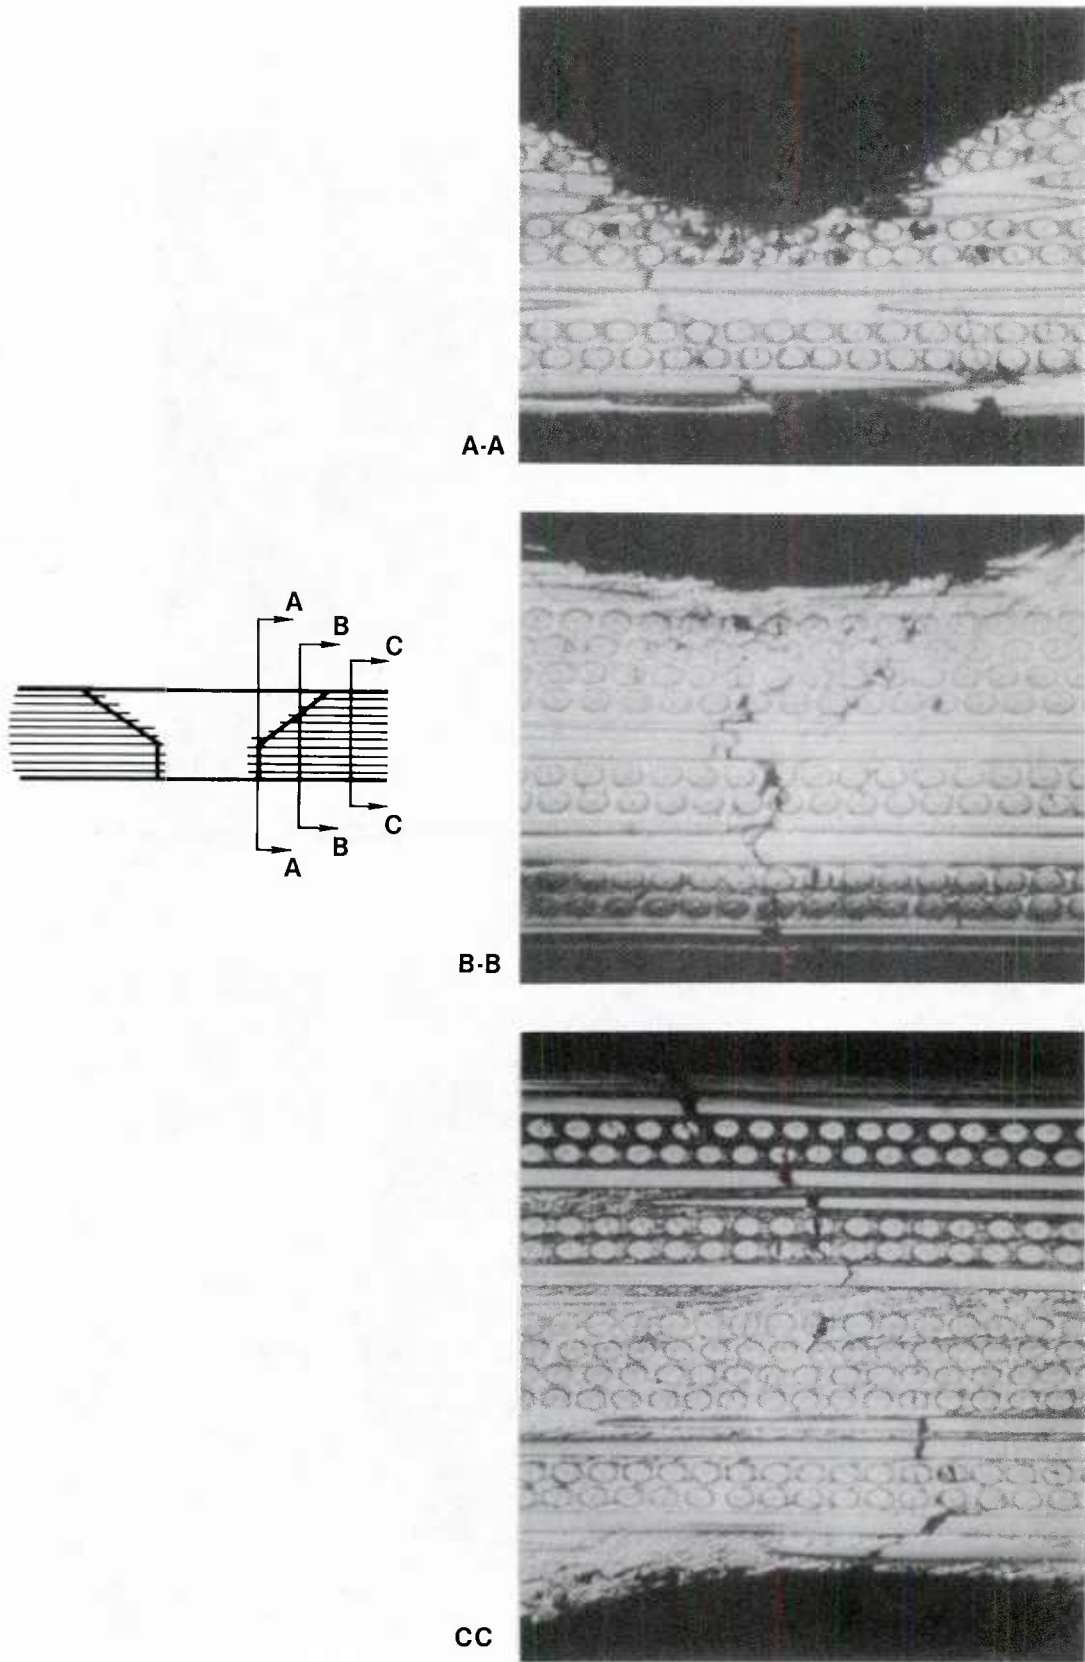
Sectioning Shows Crack Growth in $0/\pm 45$ Countersink Hole Specimen
